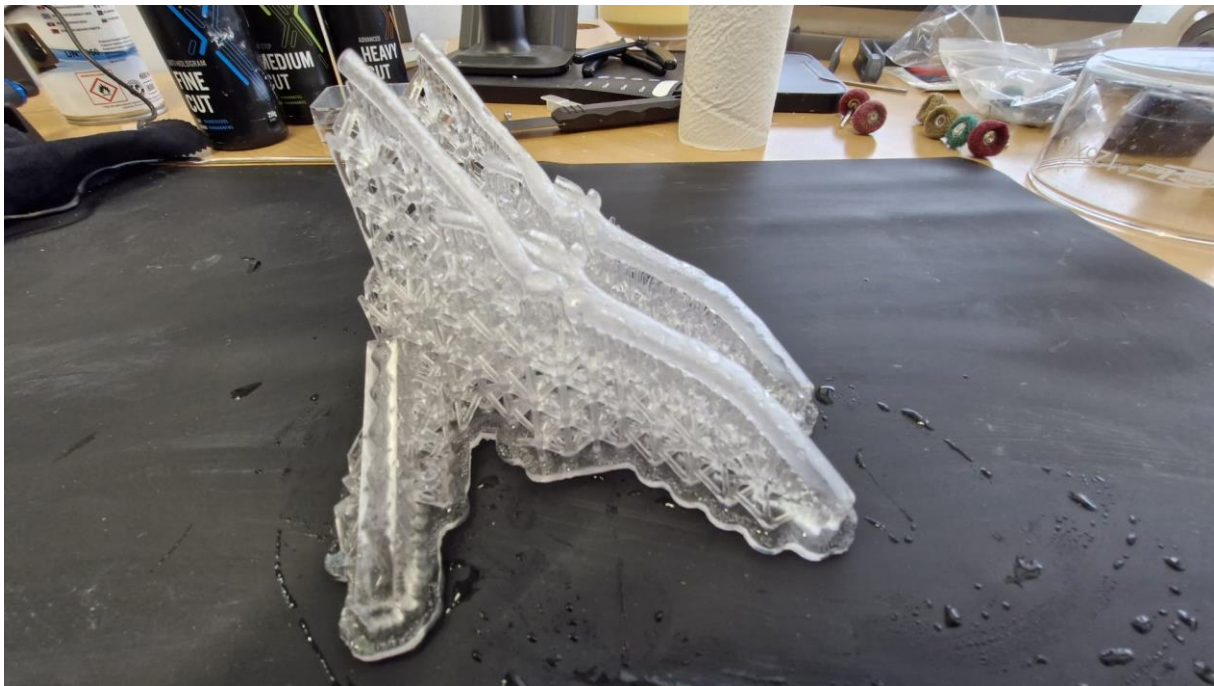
Biomed Elastic 50A V1 resin prints without supports removed.
